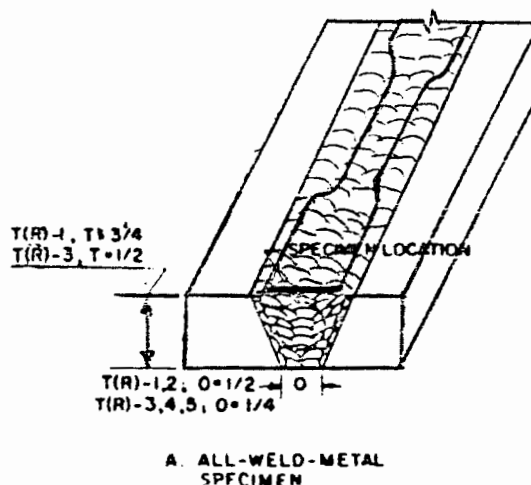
Preparation of All-Weld Metal Specimen.
